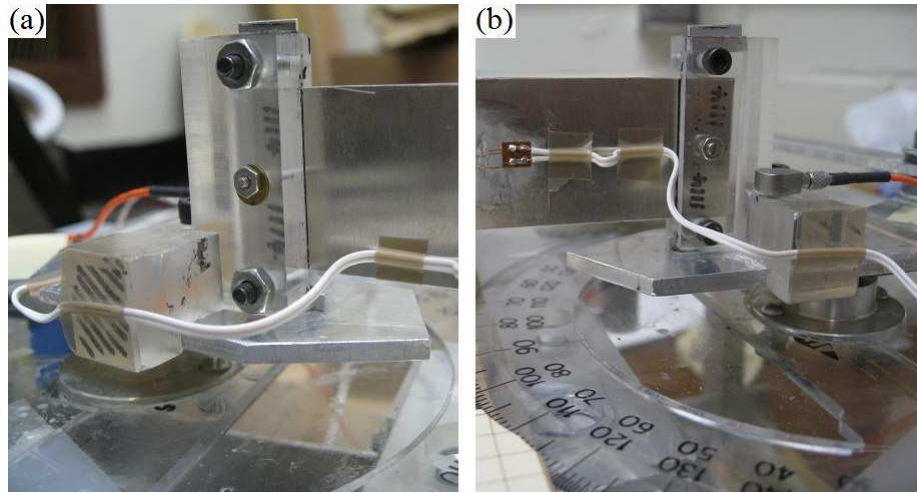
Close-up view of clamping fixture from (a) nut side, (b) bolt side. Note little shims placed top and bottom sides to prevent bowing of the clamp upon tightening.
